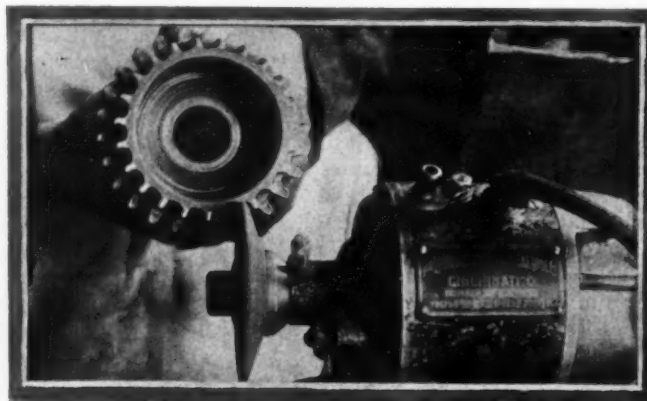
Showing an emery wheel on an electric motor for use in grinding burrs off gears
